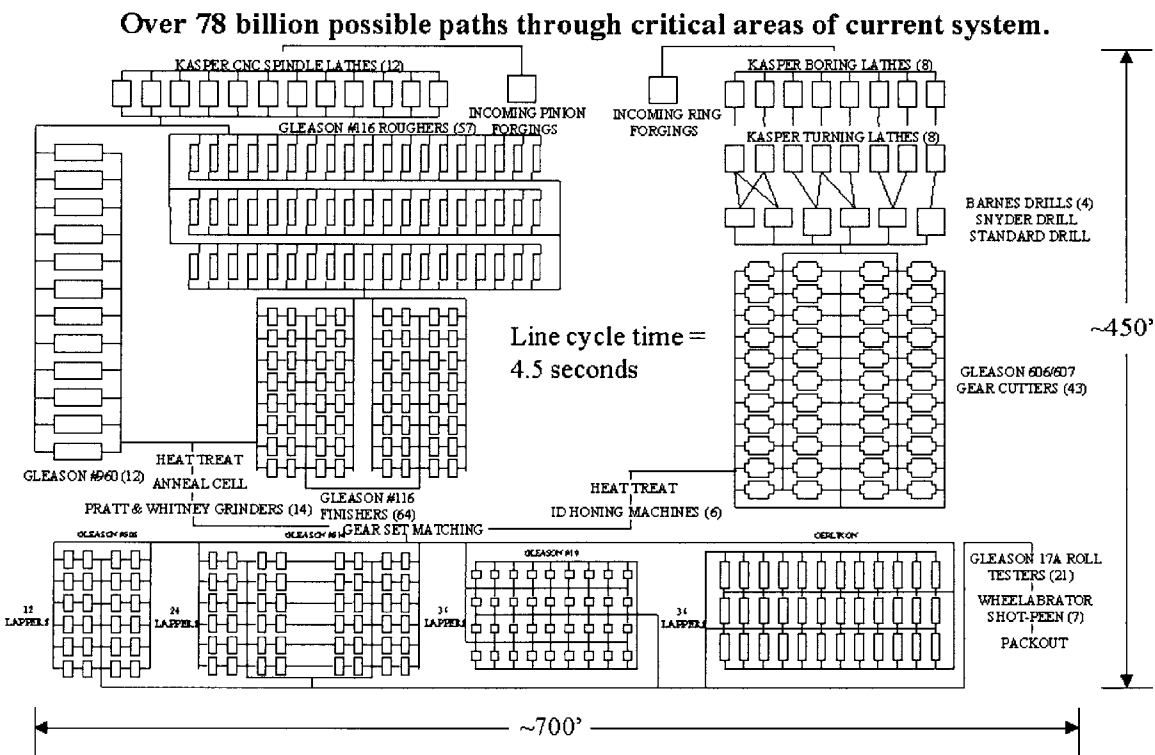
Existing Sterling Manufacturing System Layout for Manufacturing Gears
